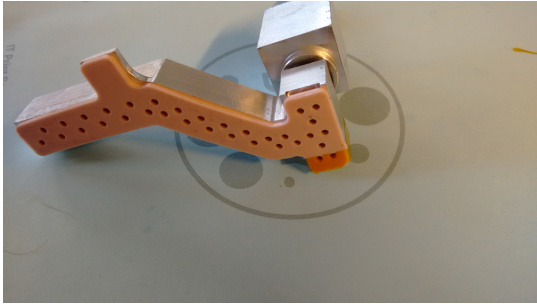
Picture of the gluing tool used for the gluing of the *Kapton Flex Cable* onto the SiD tracker sensors. Based on the tool used by the University of Hamburg CMS pixel group for the assembly of their modules [84].
